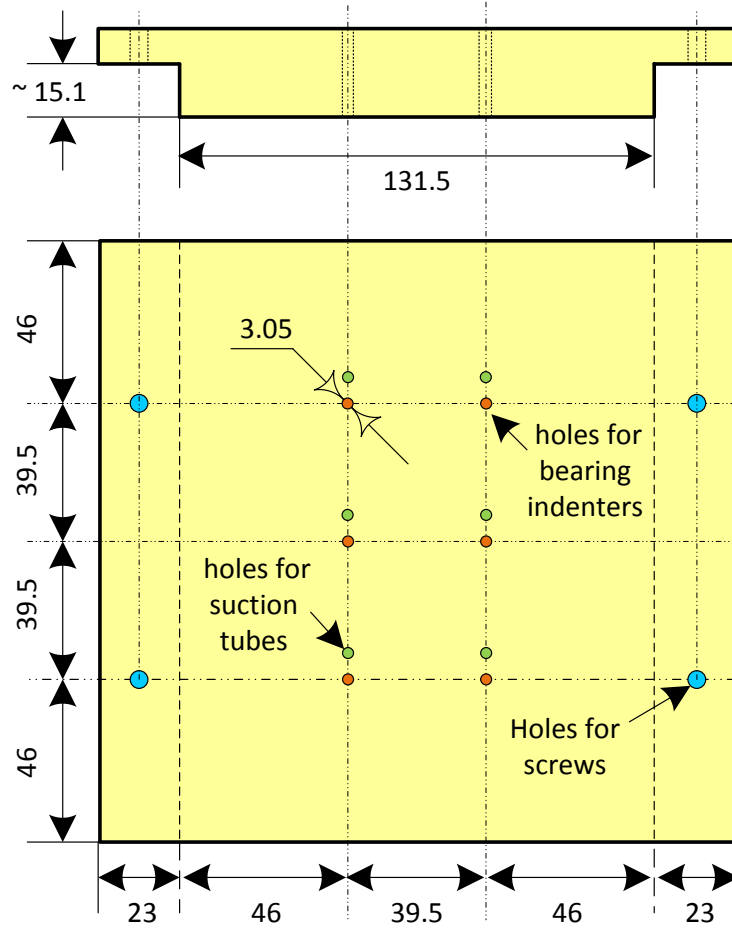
The top and side view of the indenter holder plate with dimensions (mm) and positions of holes. The size of the holes for the indenters and the suction tubes are the same.
